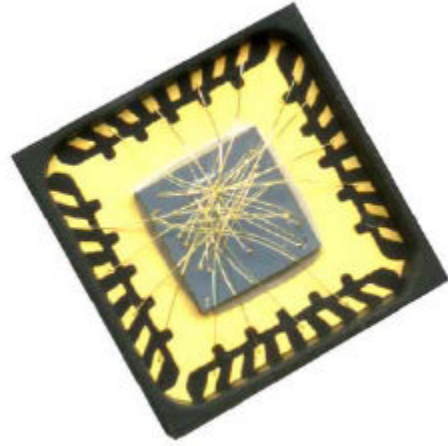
Example of open cavity QFN with crossing insulated bonding wires.
